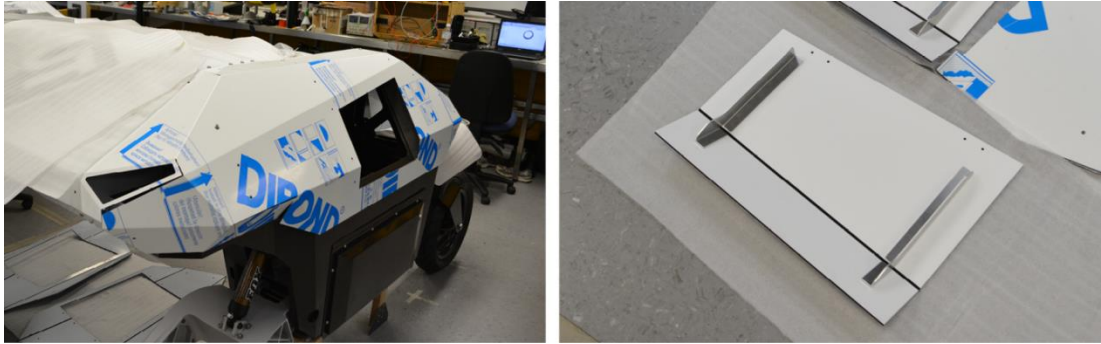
The left image illustrates the side cover panel in position on the chassis prior to being fastened down. The right image show the door structure with aluminium support brackets attached to the inside surface. VHB 4941 was used for attaching the brackets.
